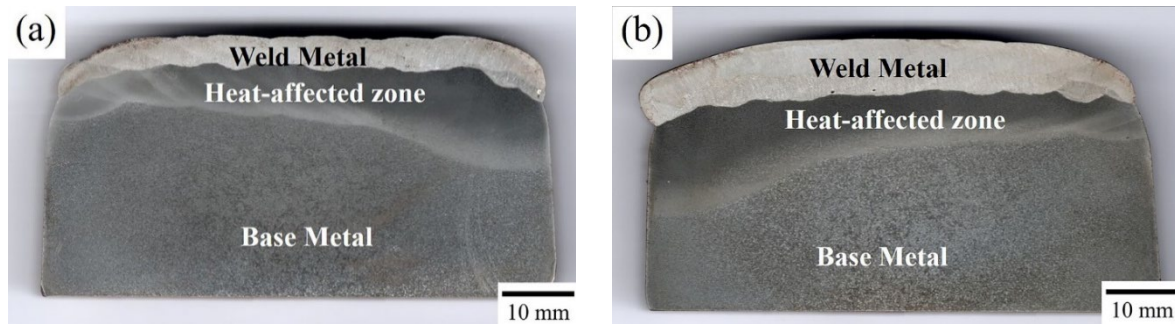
Macrostructure of (a) weldment 1 and (b) weldment 2.
